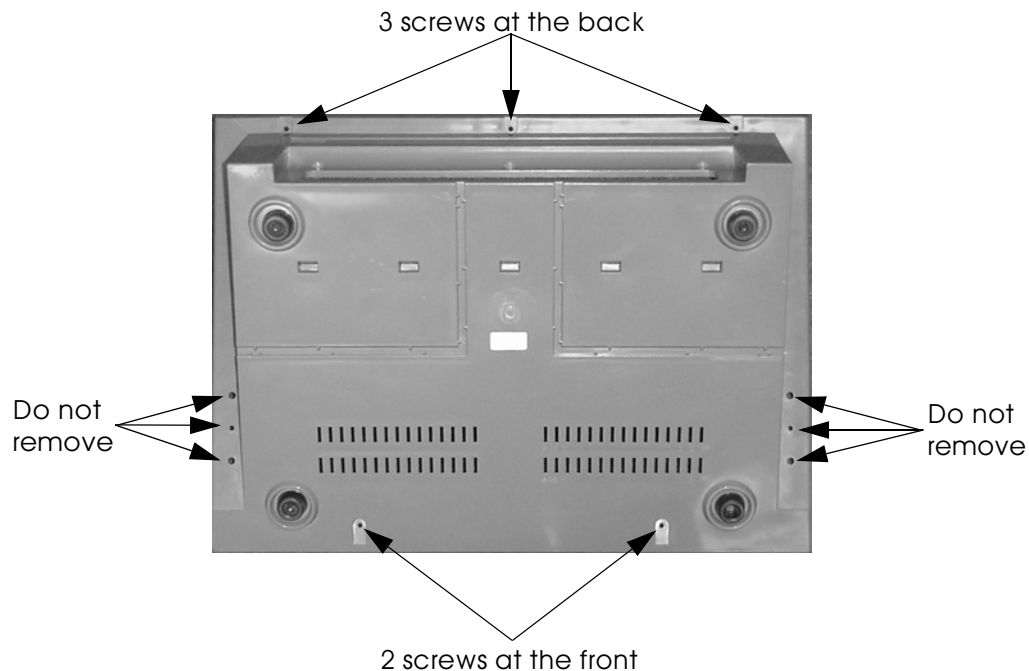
Location of Desktop Assembly Screws on Bottom of Console
